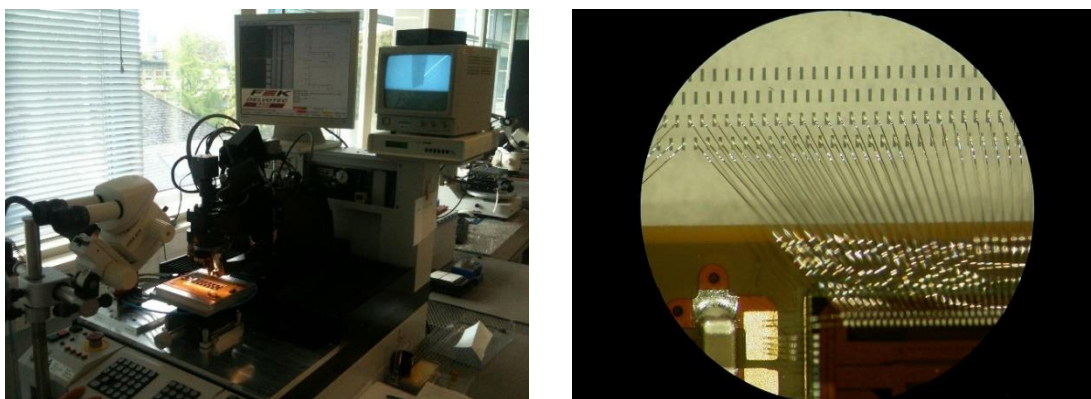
Wire bond of read-out ASIC chips to the sensor. Wire bond machine in Freiburg (left) and wire bond test between chip and glass sensor in standard bond configuration (right).
